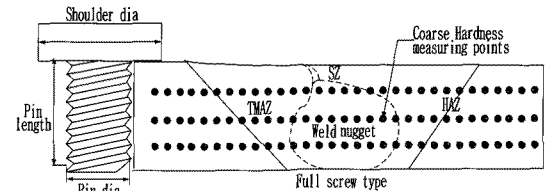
Vickers hardness measuring positions of welding zone on butt-jointed specimen
